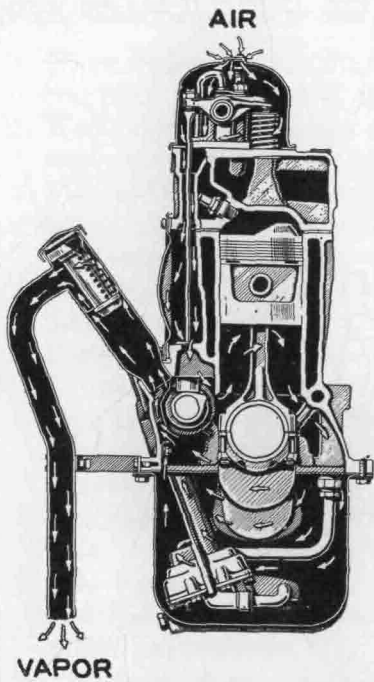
Crankcase ventilating system in an overhead-valve engine.
